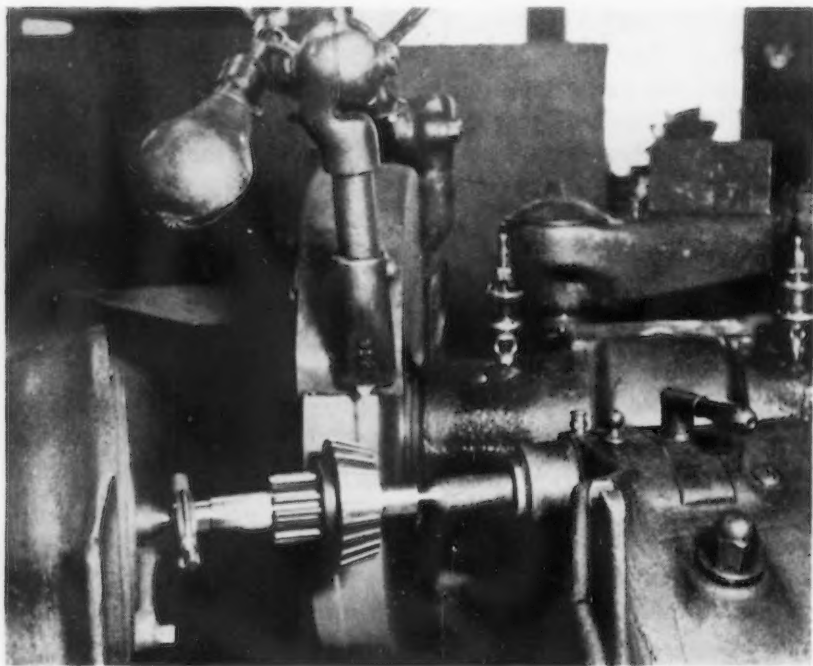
In grinding a taper seat on this heat-treated friction clutch part, no variation from standard size is permissible. In common with the other machines, the grinders for this work are provided fixtures for local lighting.
